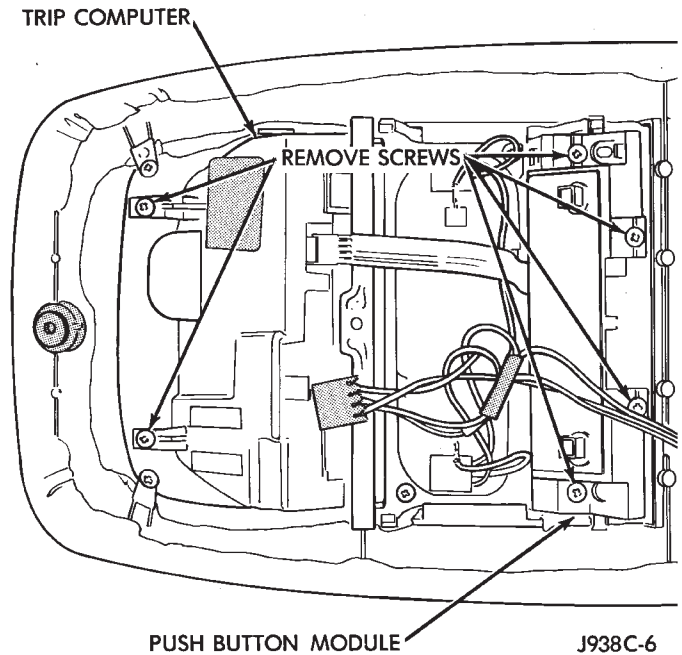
Trip Computer, Compass, and Thermometer Display Module Remove/Install - Typical
